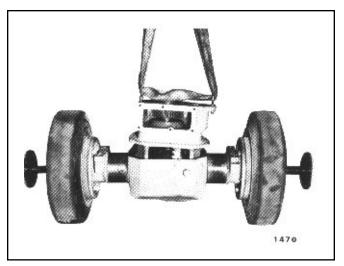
REMOVE THE SPEED REDUCER AND DIFFERENTIAL ASSEMBLY
